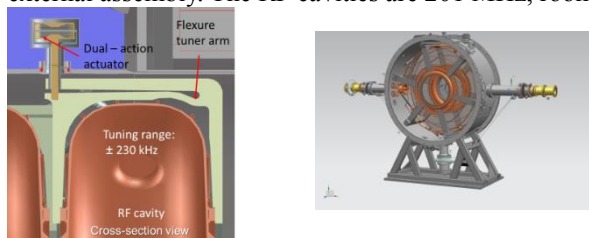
Cavity section showing tuning arm system, and view of the single cavity test stand at the MTA [5].
